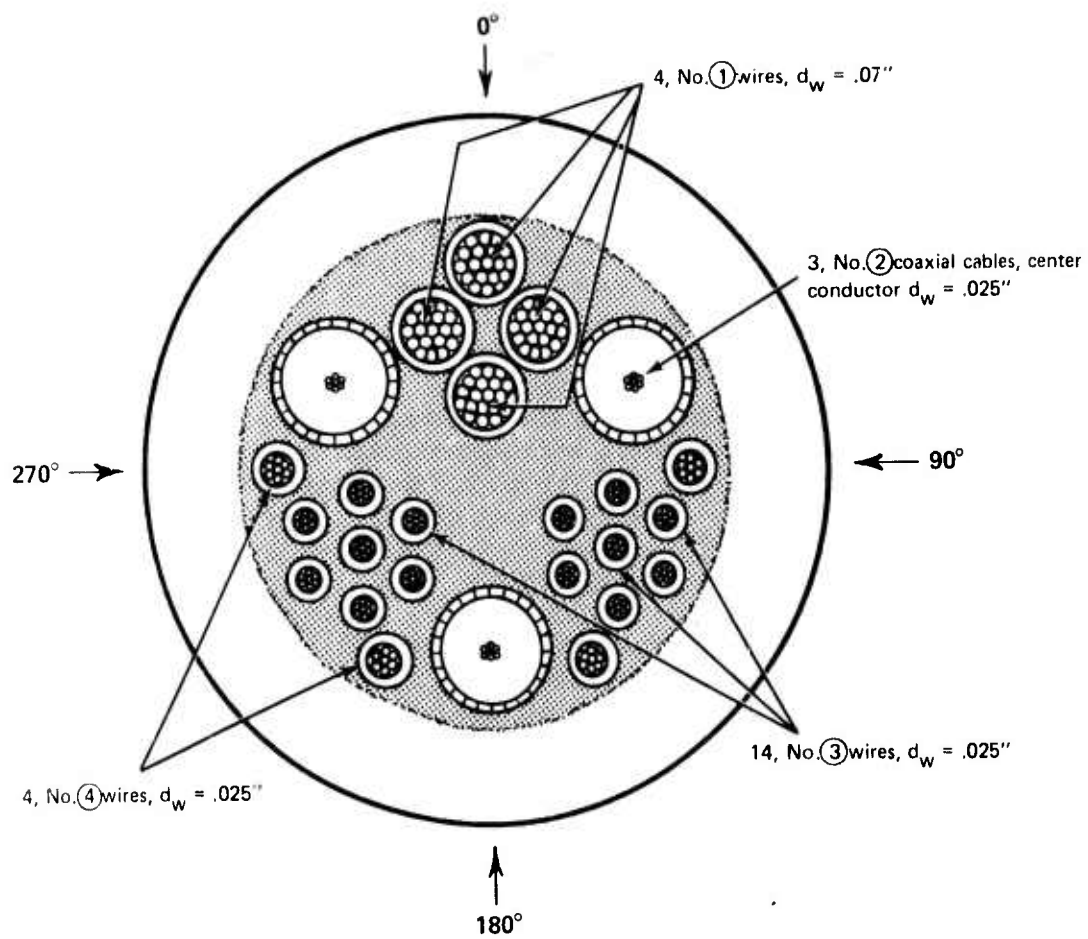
Scale Drawing of Cross Section of Multiple Conductor Cable Used in Ballistic Tests.
